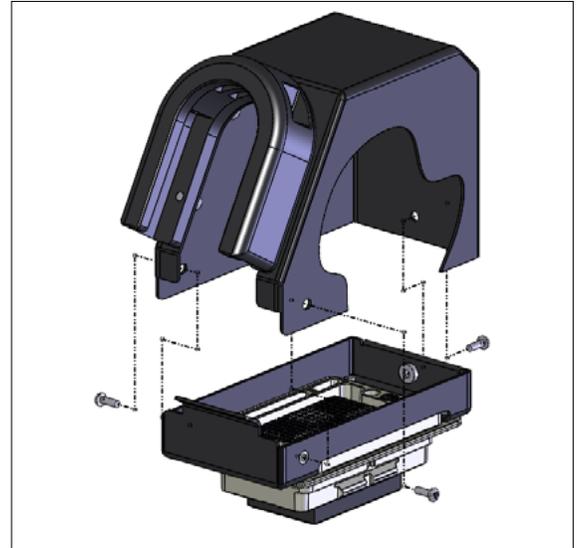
Figure D. Mount the receiver and mounting frame assembly to the backshell.
